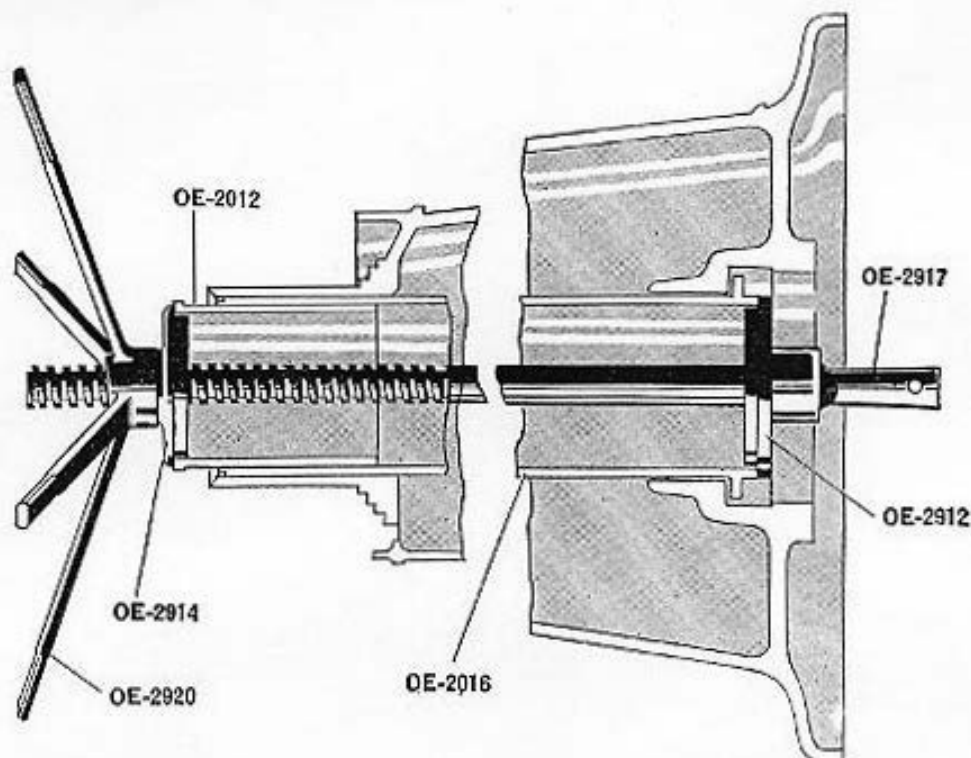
Assembling column upper bearing bushing (OE-2012) into column guide bushing (OE-2016)
